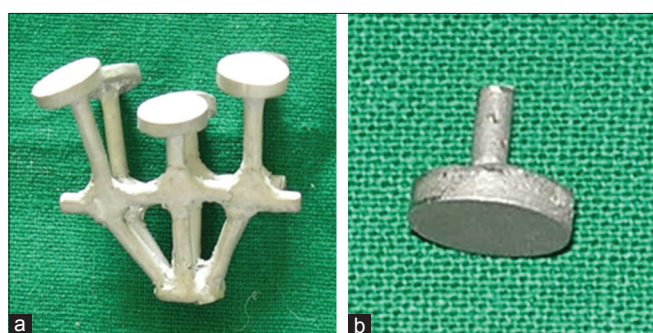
(a) Casting obtained after retrieval from the investment, (b) individual metal casting after cutting of the sprues and sandblasting.
